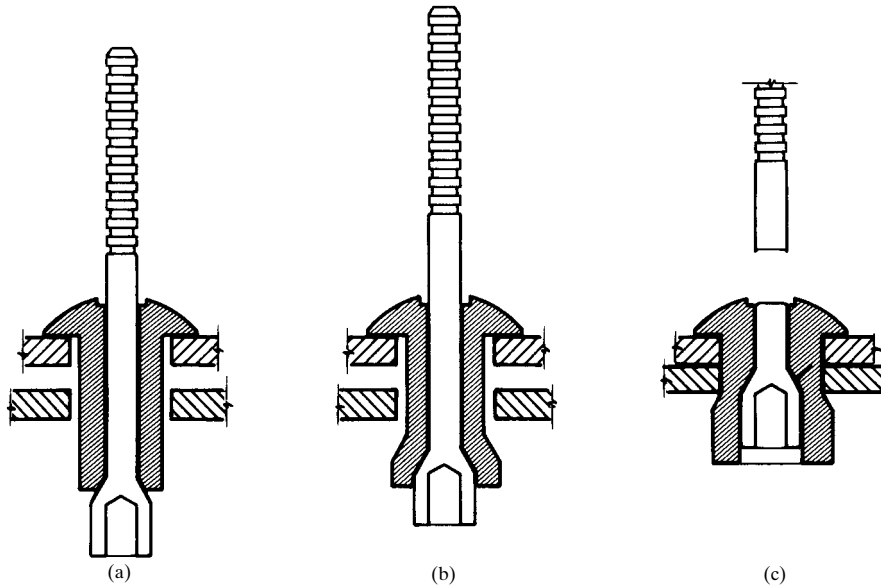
Pull-through-type blind riveting. (a) Before riveting; (b) after riveting.
